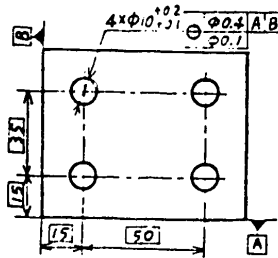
An Example of Composite Positional Tolerancing
